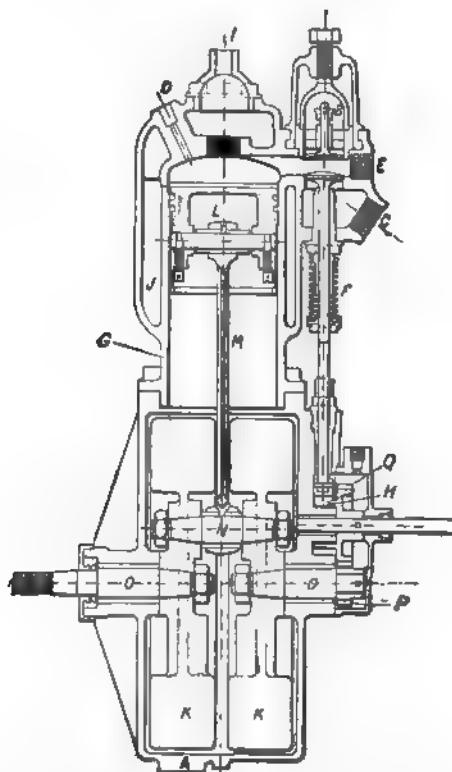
Section of the De Dion and Bouton Single-Cylinder Water-Jacketed Carriage Engine. Parts are as follows. A, crank case formed by two cylindrical pieces bolted together; B, the inlet valve for the fuel mixture from the carburettor; C, the exhaust valve, held closed by a helical spring, F, and opened by the cam, H; D, the opening for the compression tap; E, the threaded hole for the sparking plug; F, the spring on the exhaust valve rod; G, the cylinder; I, the port of exit for the jacket water from jacket, J, the inlet being at a point near the base of the jacket; K and K are the flywheels, or crank discs, which are joined together as shown, by the crank pin, N; M is the connecting rod; N is the crank pin; O and O are the crank shafts, that on the right carrying the pinion, P, that on the left being threaded for connection to the driving gear; P is a pinion on the crank shaft meshing with gear, Q.
